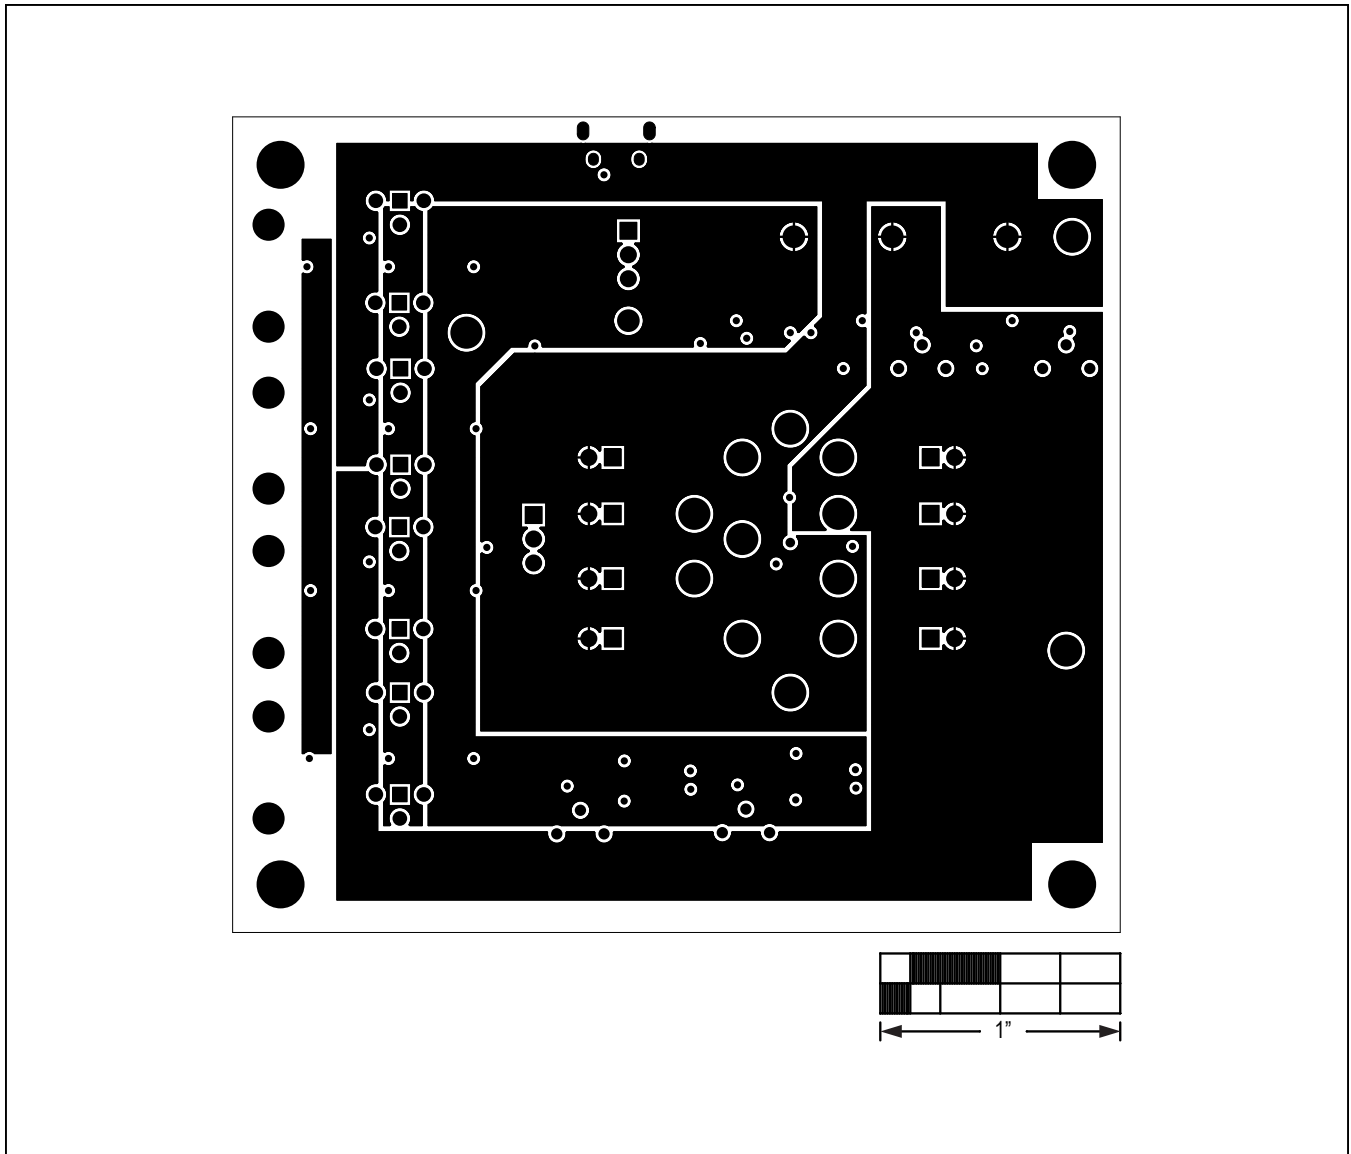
MAX14611 EV Kit PCB Layout—Layer 3
